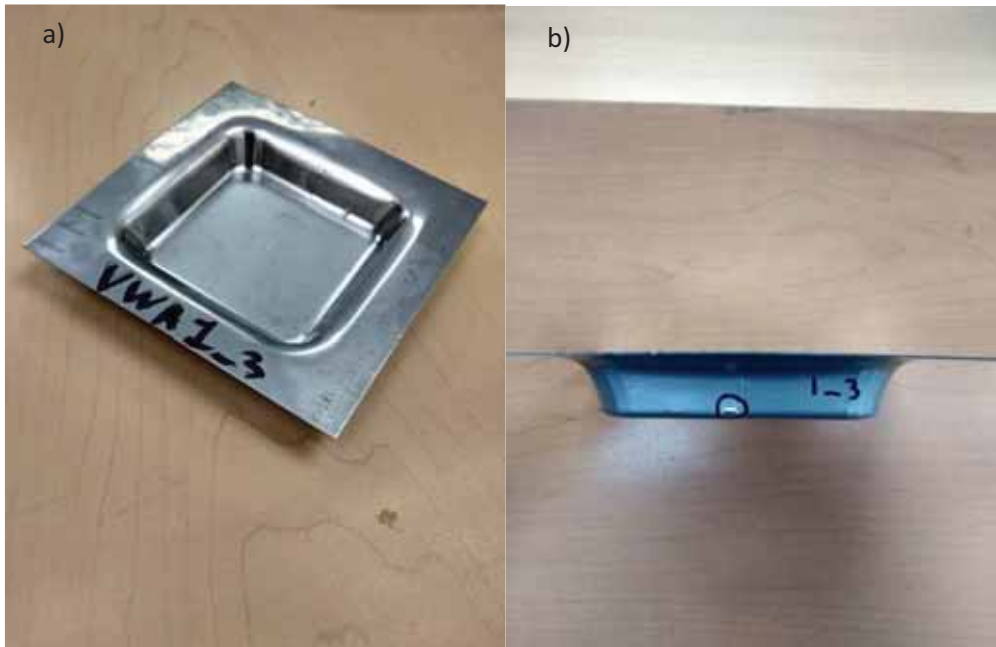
a) Pyramid Frusta A3 b) circled Fracture.
